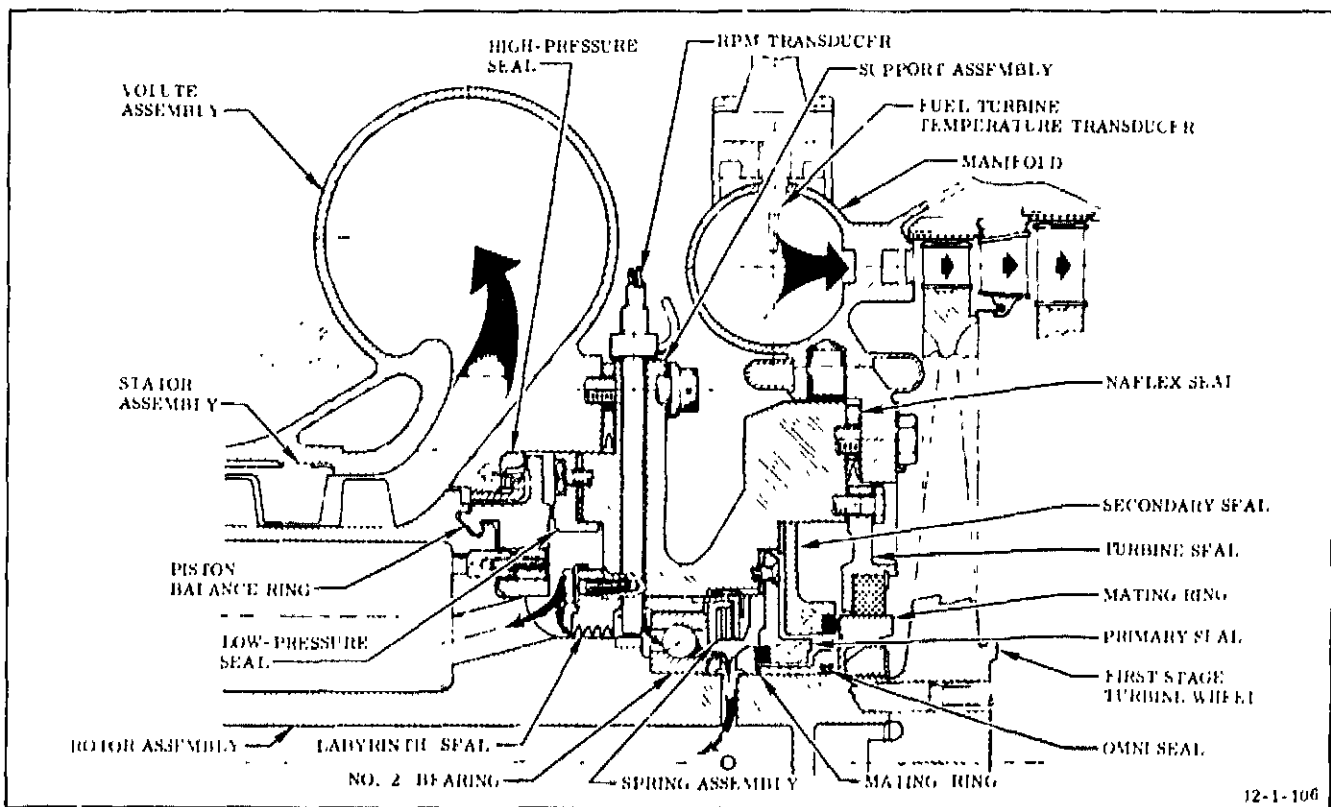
Fuel Turbopump (Sheet 2 of 2)
